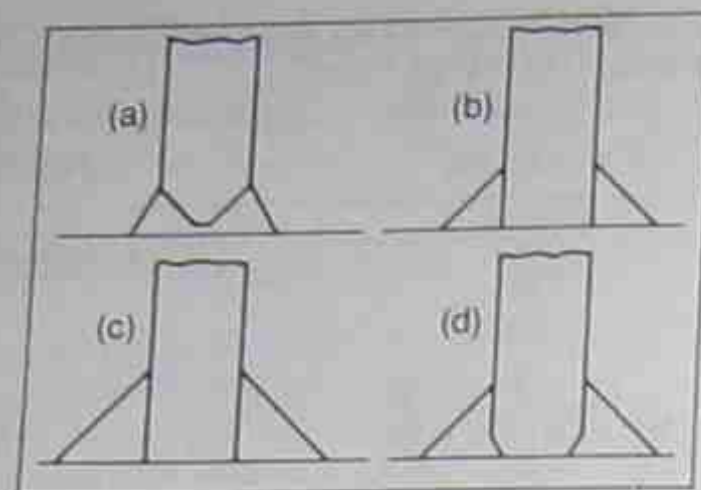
Different methods of welding used to produce a T-joint: (a) full penetration butt weld, and (b), (c), and (d), twin fillet welds of different sizes to produce joints of different strengths.
